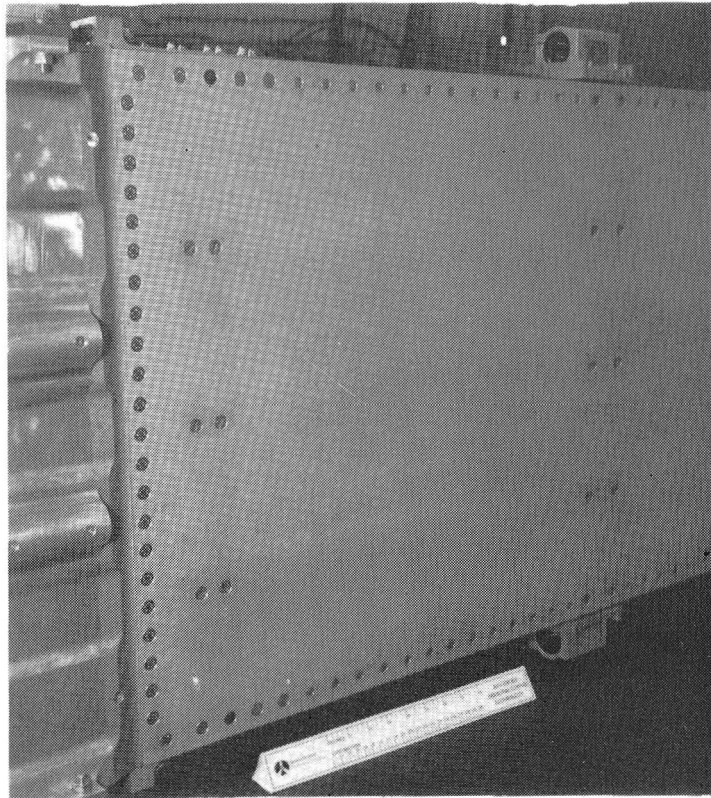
TA Moldline Side, Highlights Taper-Lok Fastener Head
